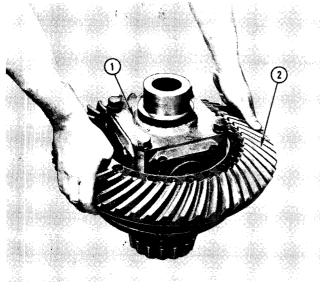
REMOVING RING GEAR 1. Differential 2. Ring Gear
